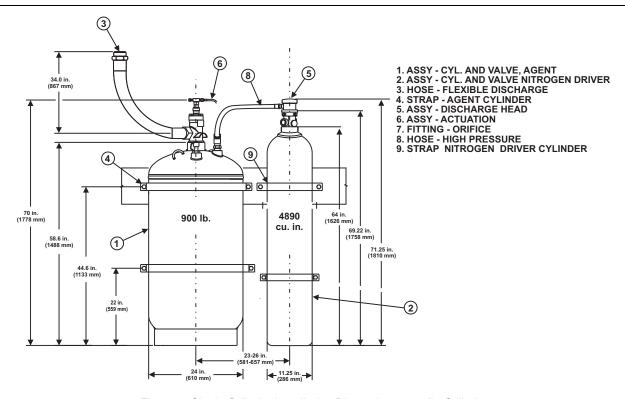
Single Cylinder Installation Dimensions, 900 lb. Cylinder
